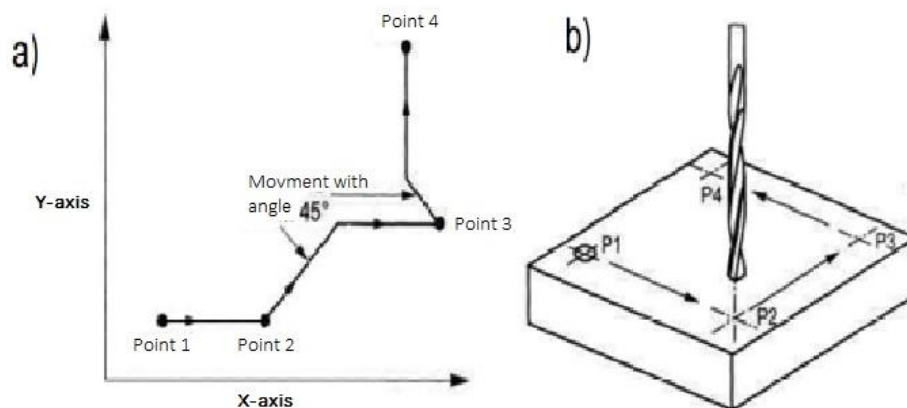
Point control principle: a) tool movement b) machining, [32]
